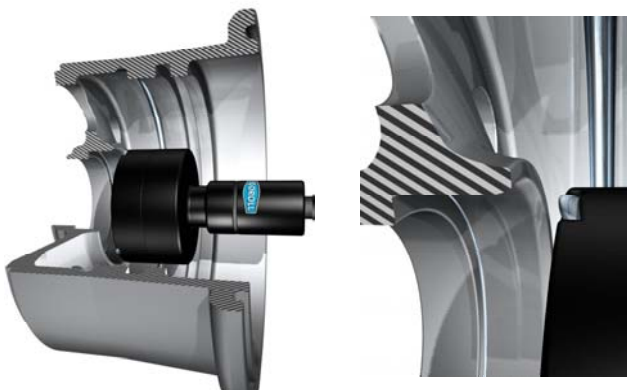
deep rolling of the center bore Fig. 6-3 .
